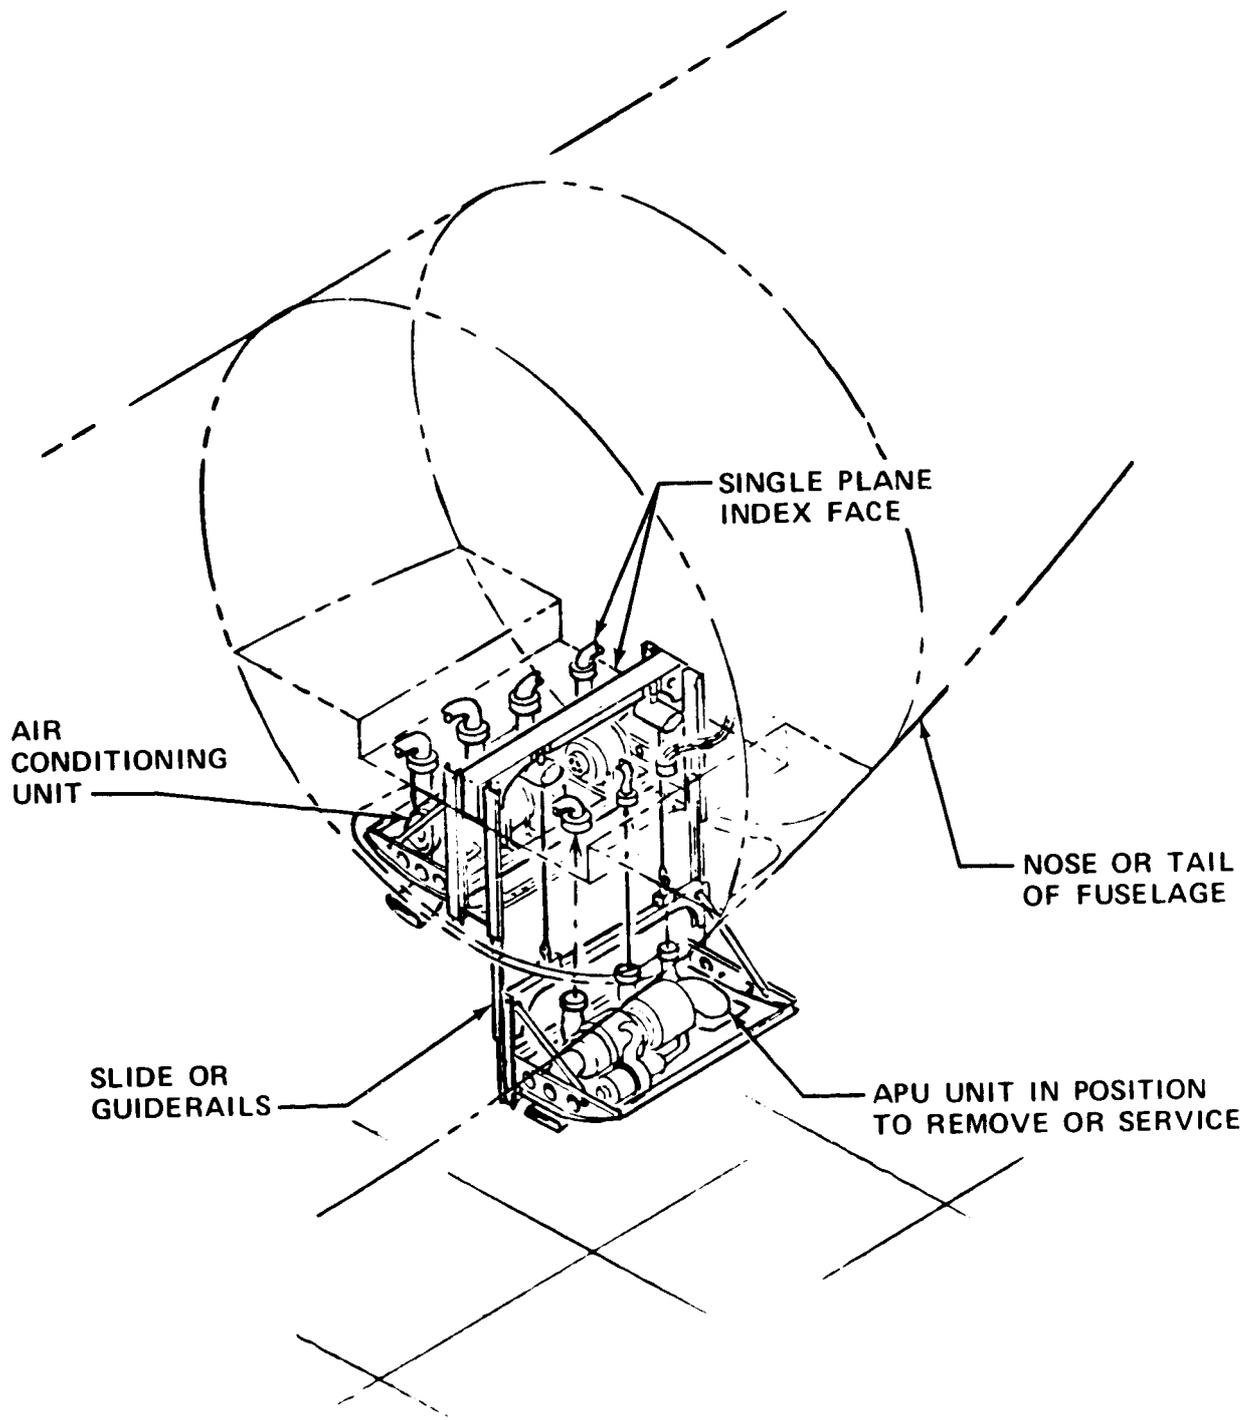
APU AND AIR CONDITIONING UNIT INSTALLATION
